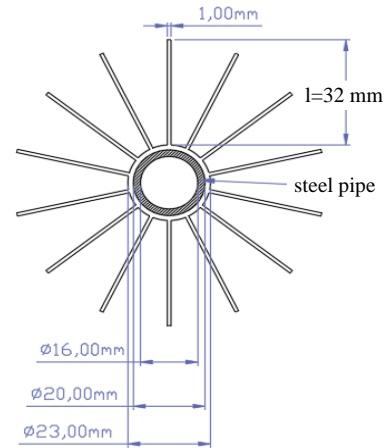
Cross section of an aluminium heating element with a steel pipe insert
